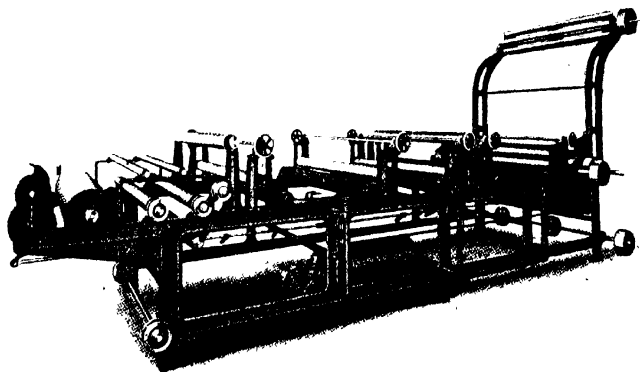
Five Burner Singeing Machine; Tulpin Style (Butterworth).
